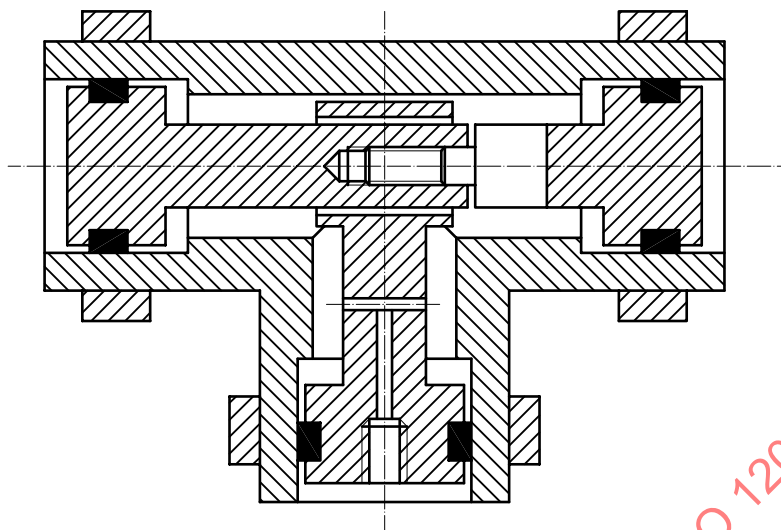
Example of a pressure-tight test piece assembly with internally pinned joints and ring seals and without hydrostatic end thrust
